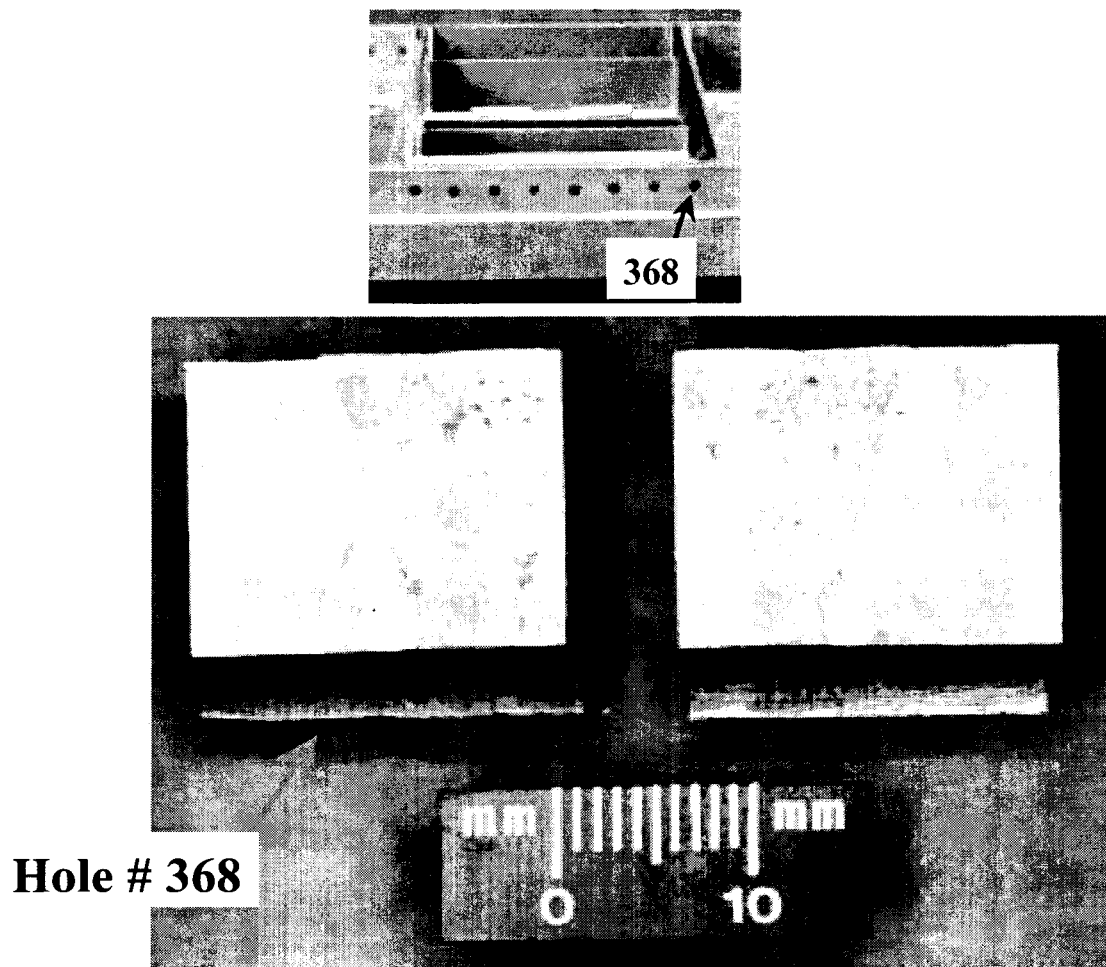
The photograph shows both surfaces of the crack emanating from fastener hole #368. The location of fastener hole #368 is shown in the small photograph.
